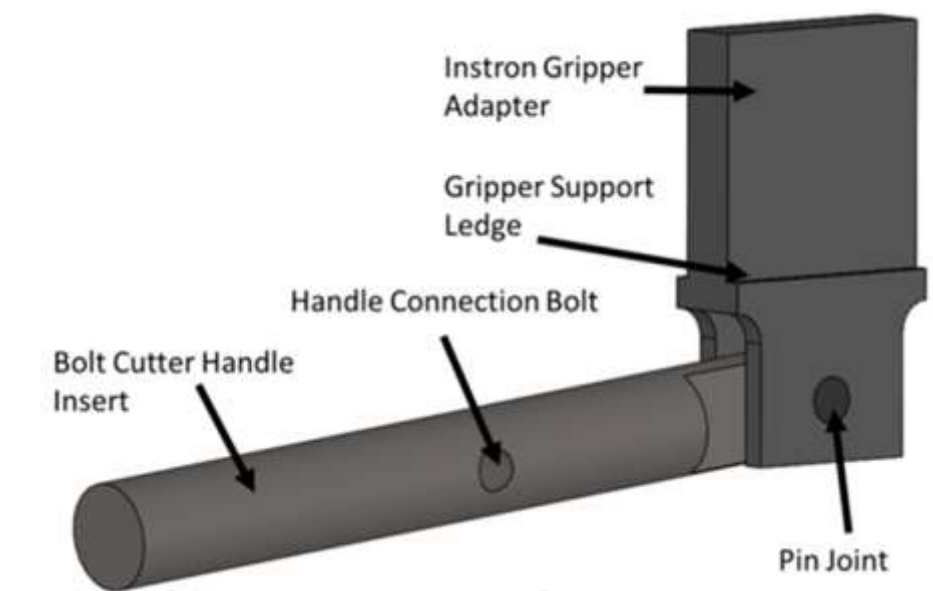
3D rendering of the custom-made Instron attachment fixture
